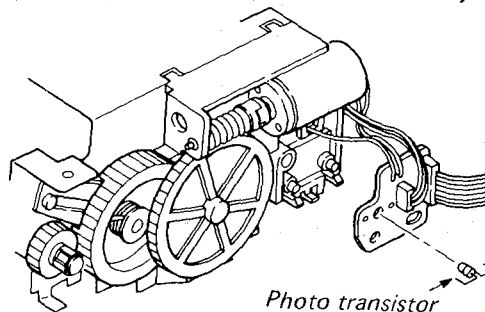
Replacement of photo transistor on FL P.C. board (R)
